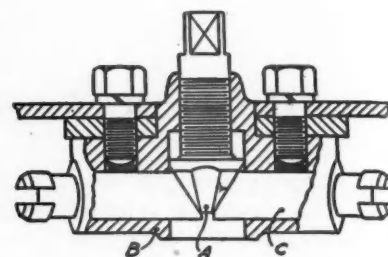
Single point adjuster incorporated in the shoe-abutment of Girling brakes
